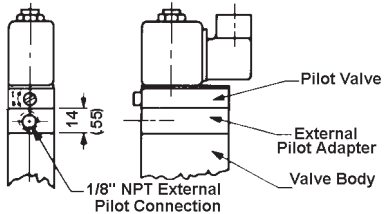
1/4" - 1/2" valve solenoid spring return
